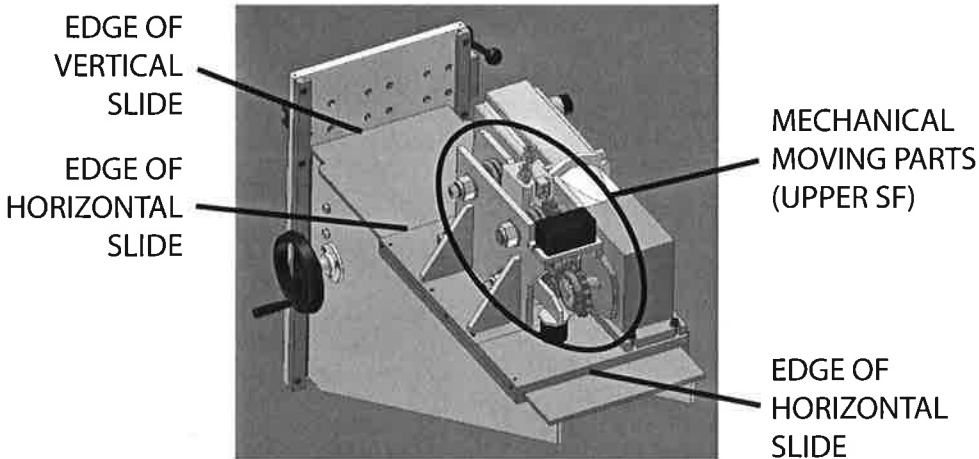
Removing Debris From the Mechanical Moving Parts, and the Horizontal and Vertical Slide Assemblies Inside the SF
